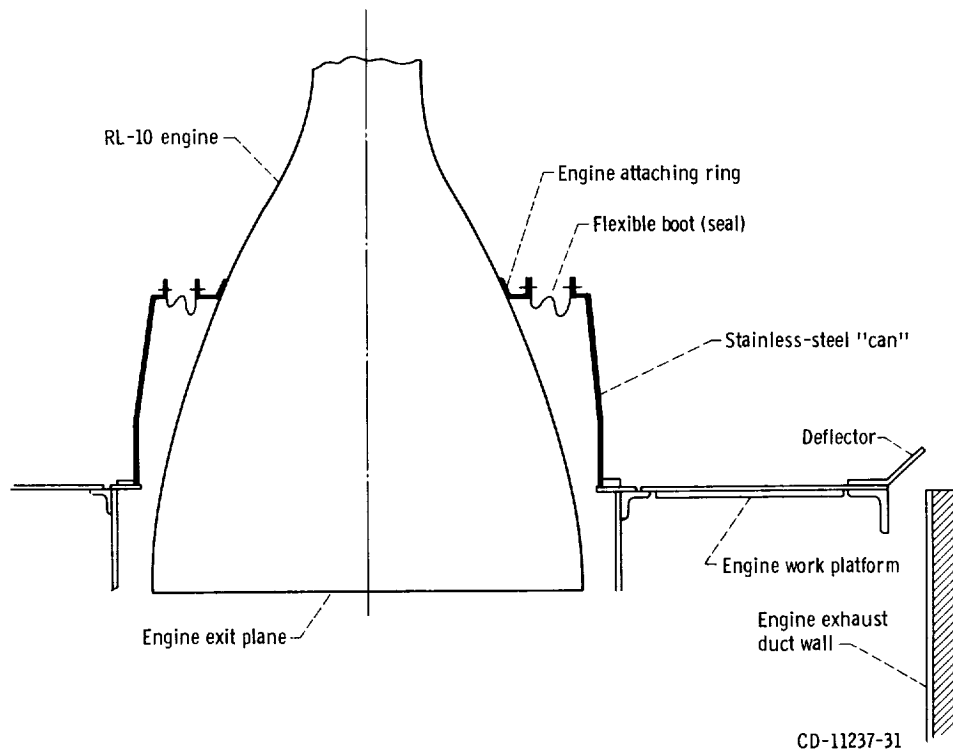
Engine-to-work-platform seal detail and deflector plate.
